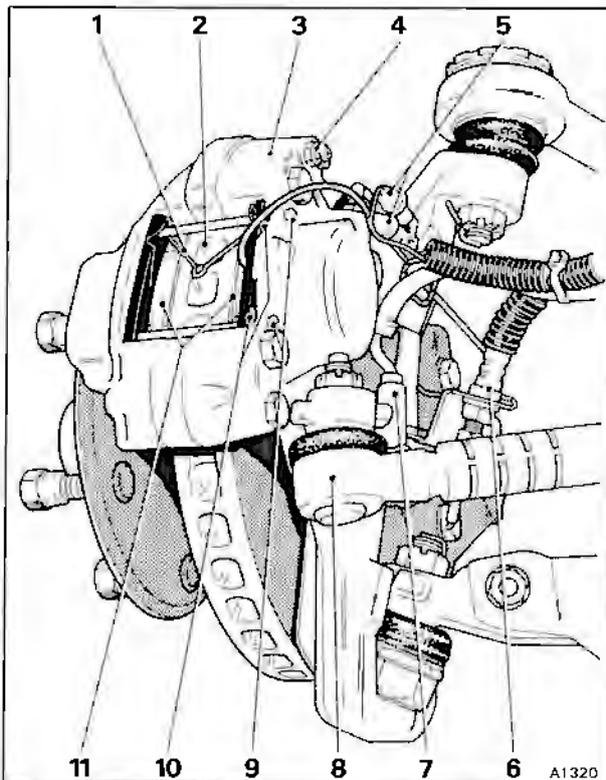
Front wheel brake caliper (cars fitted with anti-lock braking)
